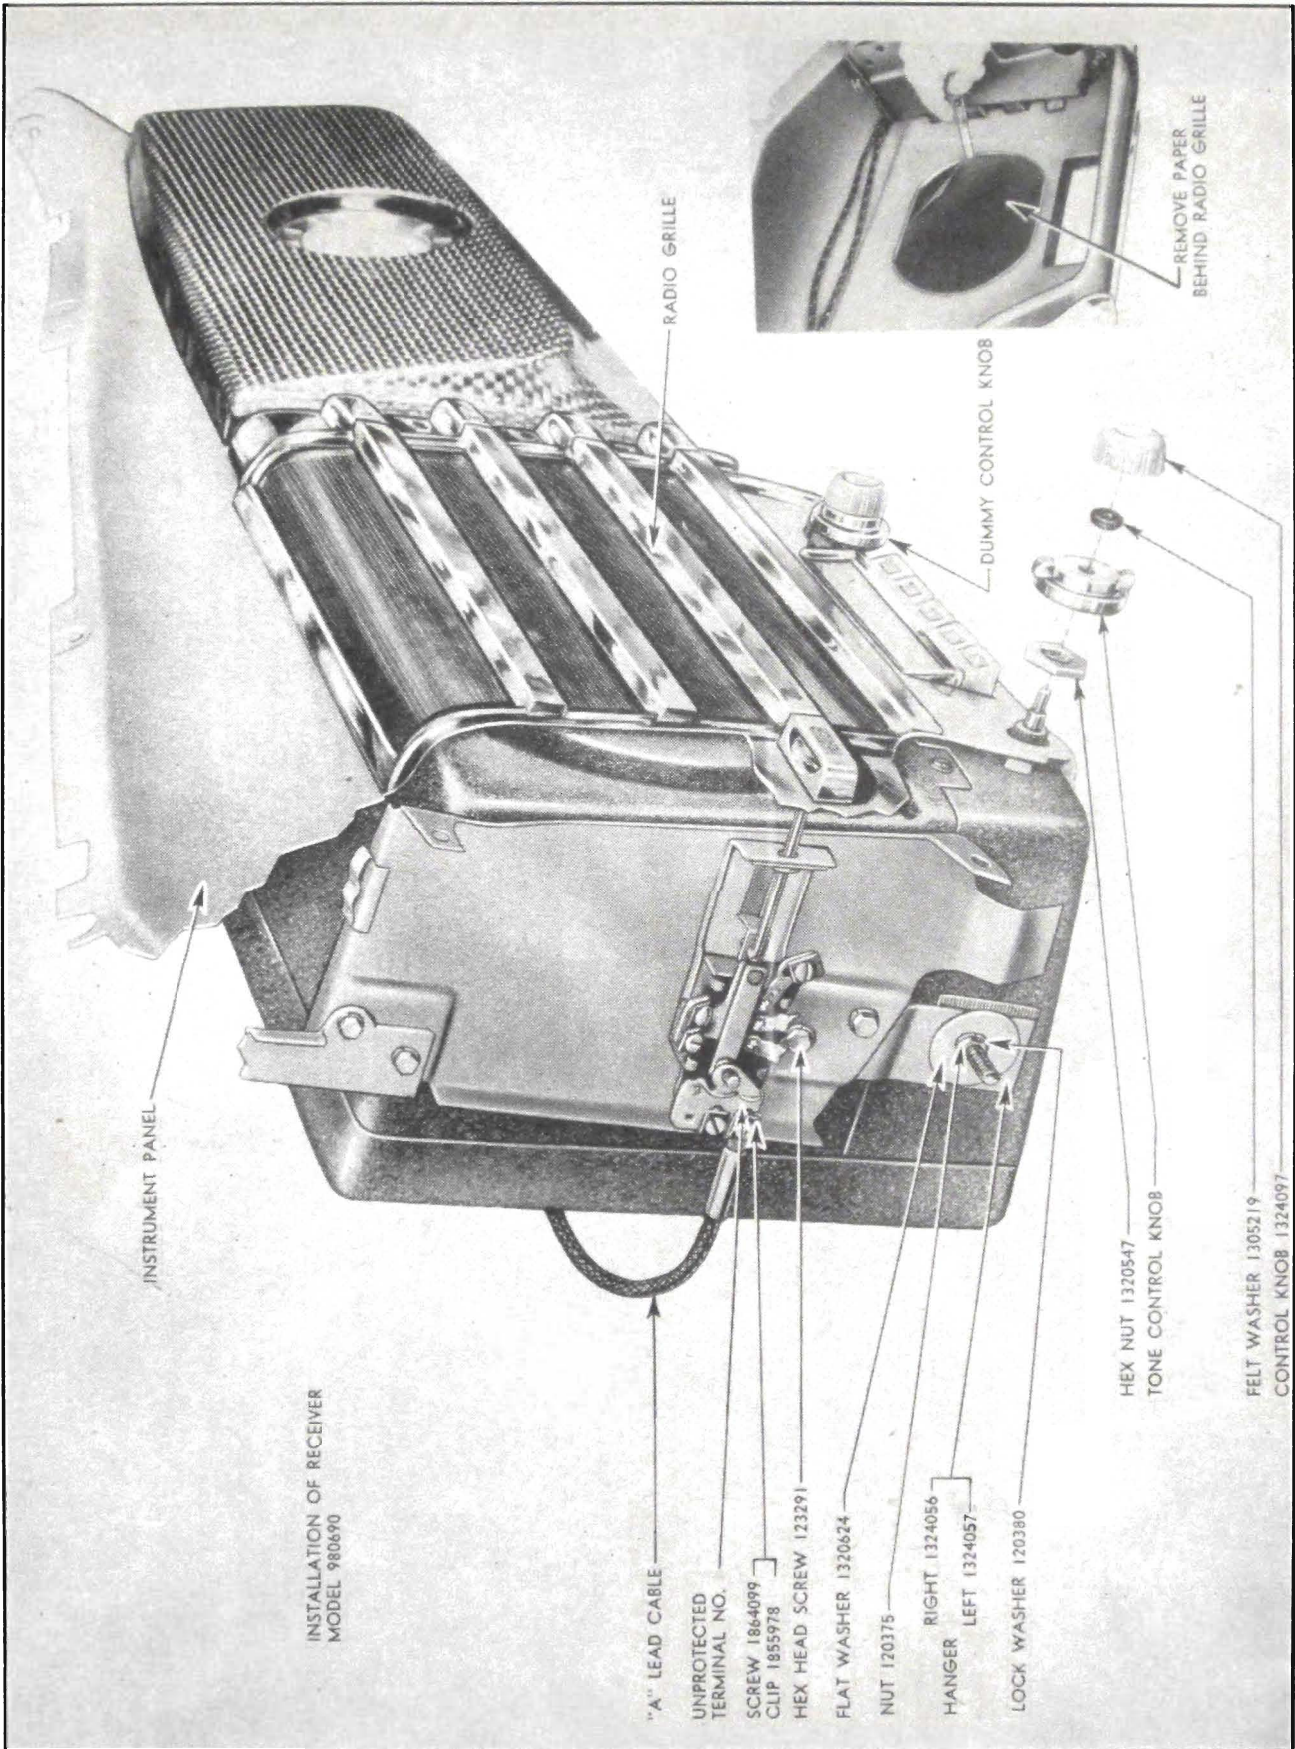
Proper Method of Attaching Radio to Instrument Panel—Series 40-60-90
